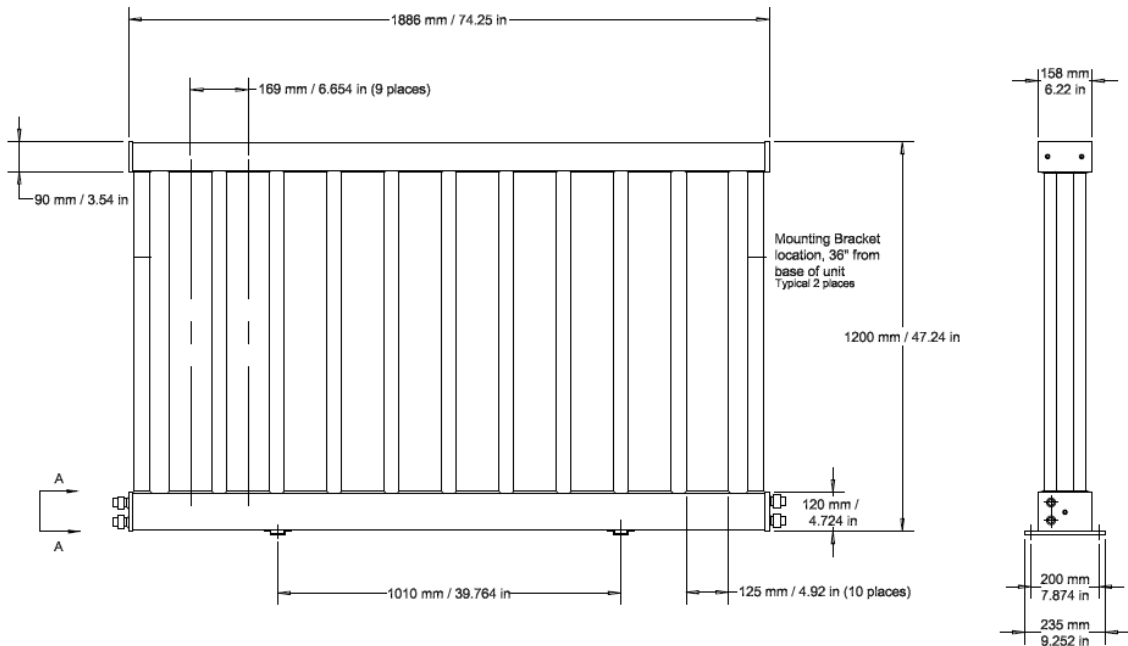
SHP410-M unit diagram showing the design and dimensions.
